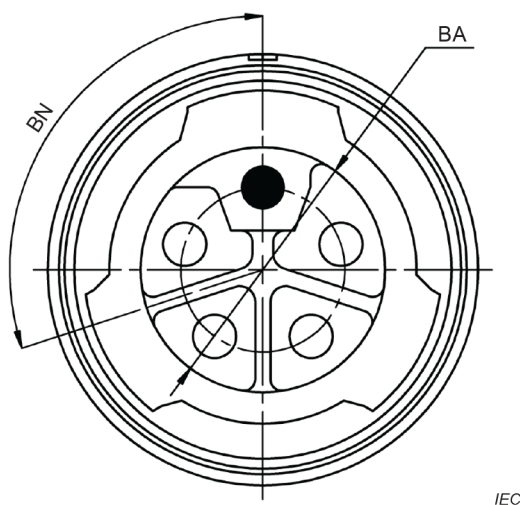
Front view of the female side of the push-pull housing for L-coding
